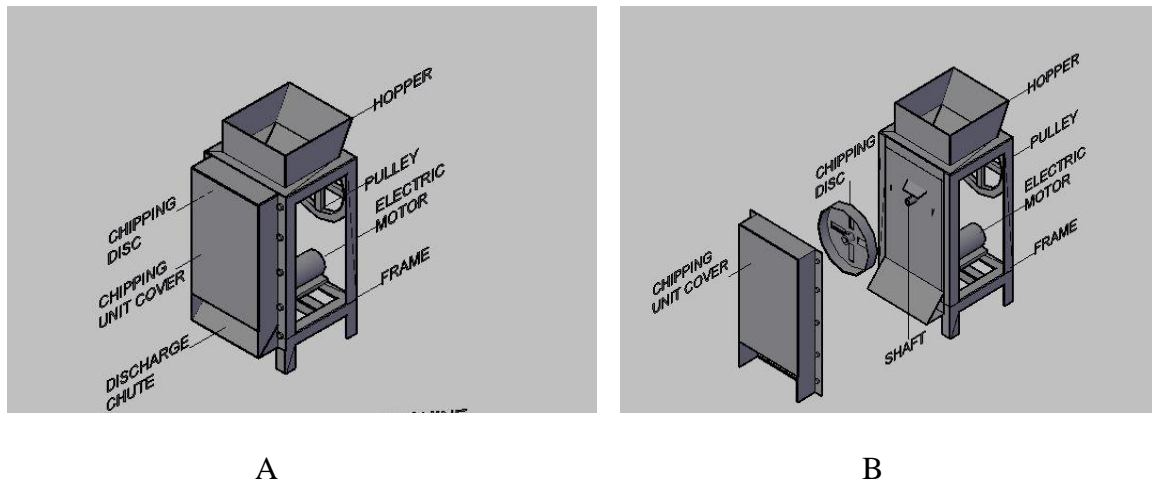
Cassava chipping machine, A: part list and B: exploded view
